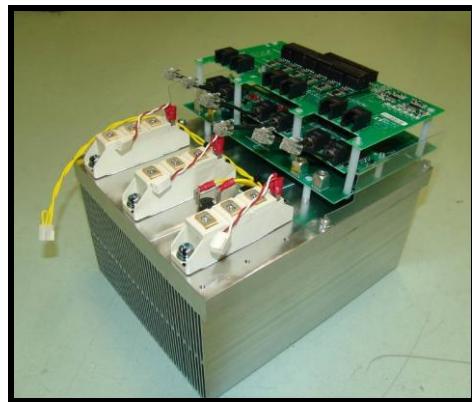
Disassembly of the medium and lower Gate Drive boards
